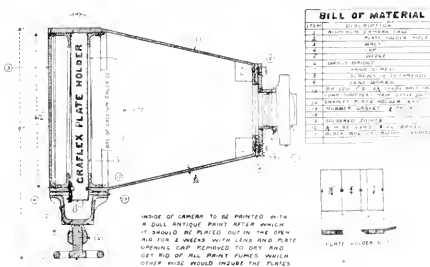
HORIZONTAL SECTION THROUGH MOISTURE-PROOF CAMERA
